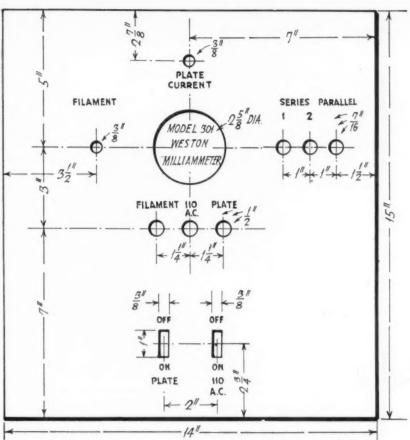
Panel Dimensions, Showing Location of Toggle Switches.
